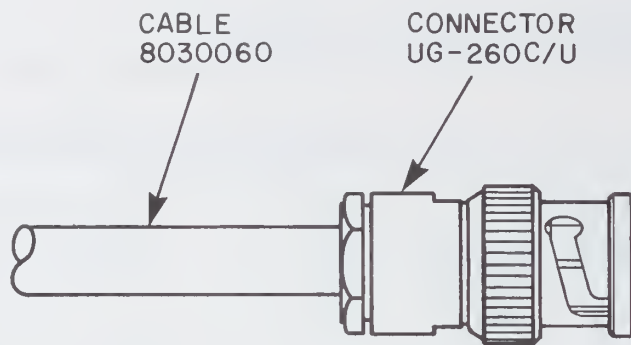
Connector Assembly, WSR-74 System Trigger Cable
